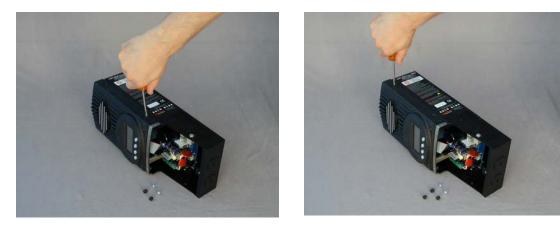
Side Screw Removal (part 2) The heat sink can now be removed from the chassis.
